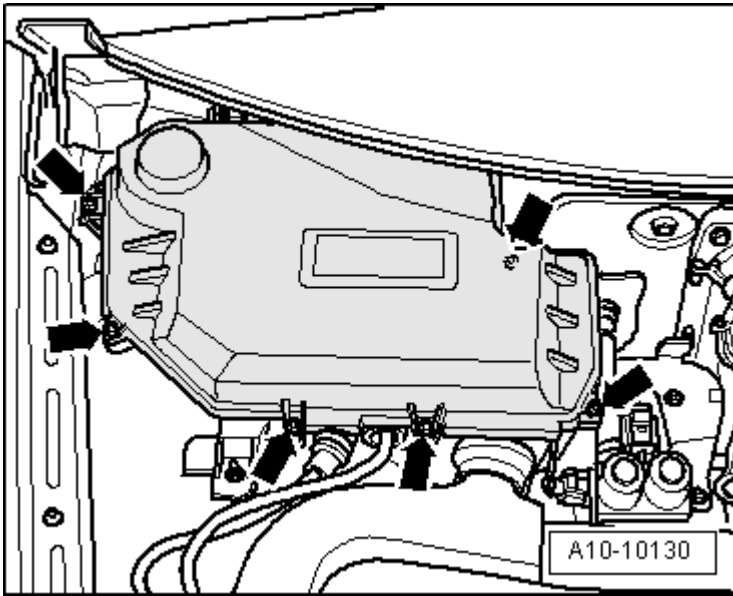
Removing Bolts And Cover For E-Box At Right In Engine Compartment
